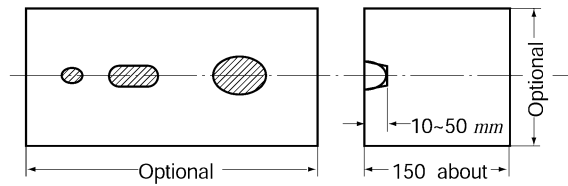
Dimensions and Shape of Test Coupon (Units : mm)
